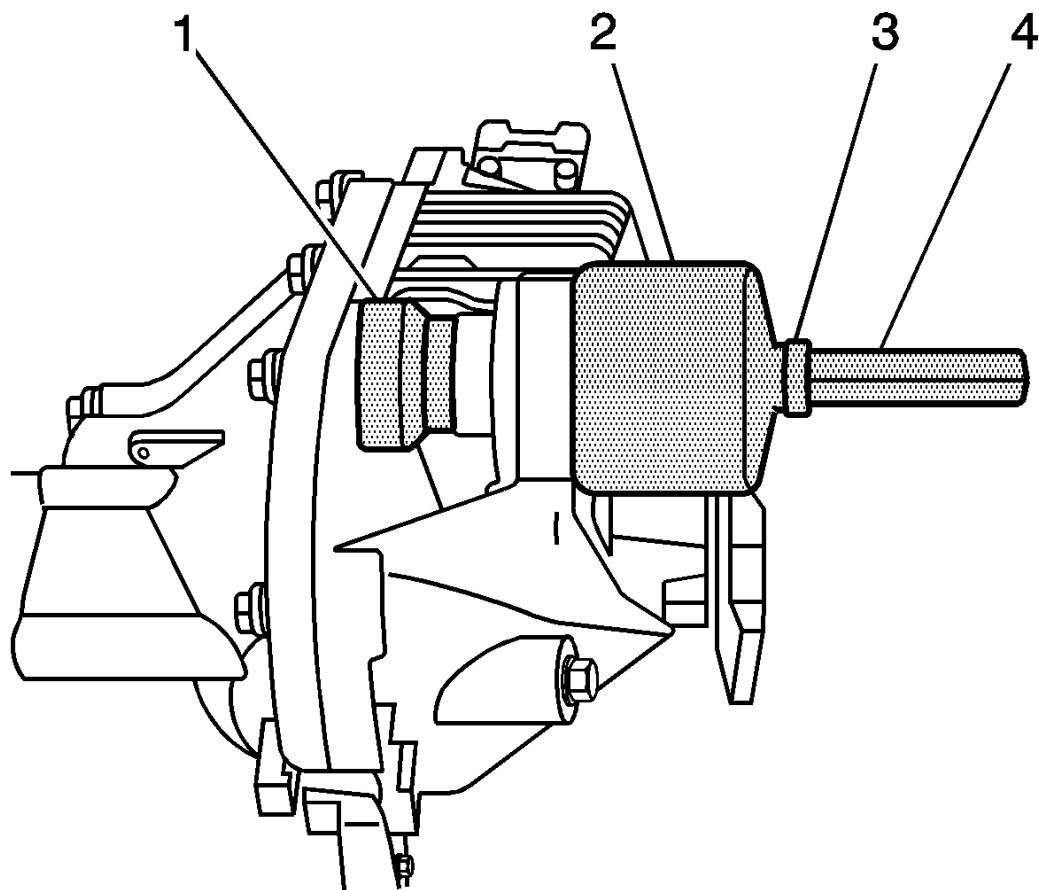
Upper Differential Carrier Assembly Bushing And Special Tool
